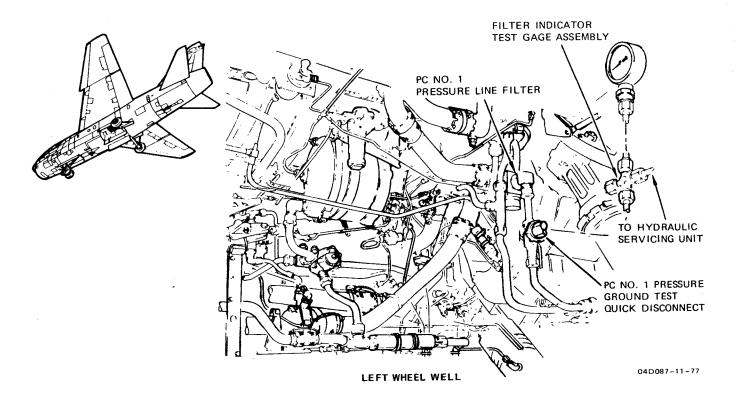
B, PC No. 1 Pressure Line Filter Differential Pressure Indicator Test Connections
